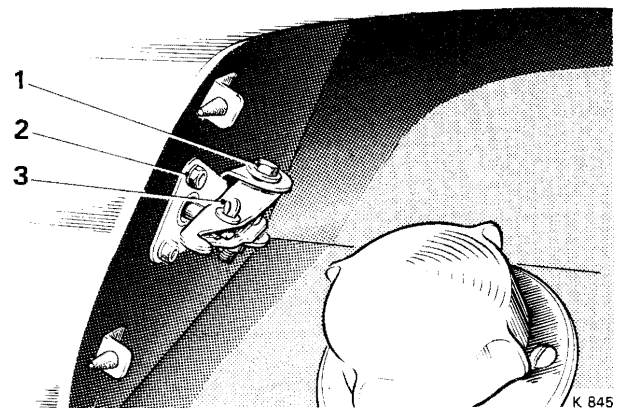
ELECTRICALLY OPERATED FUEL FILLER DOOR
